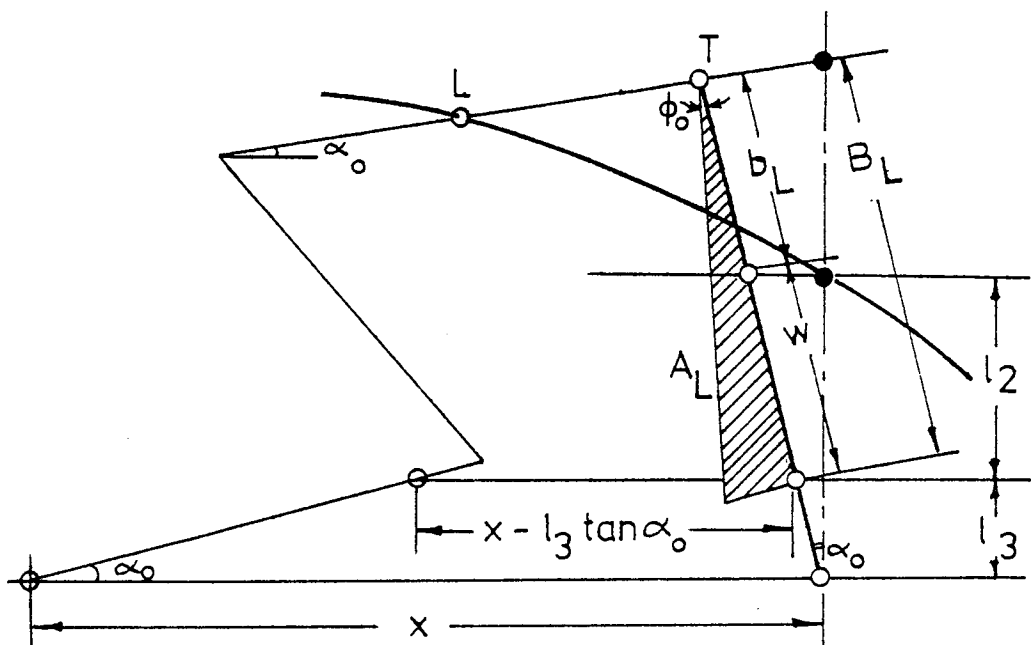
CHIP PRODUCED BY LEFT SIDE CUTTING EDGE
